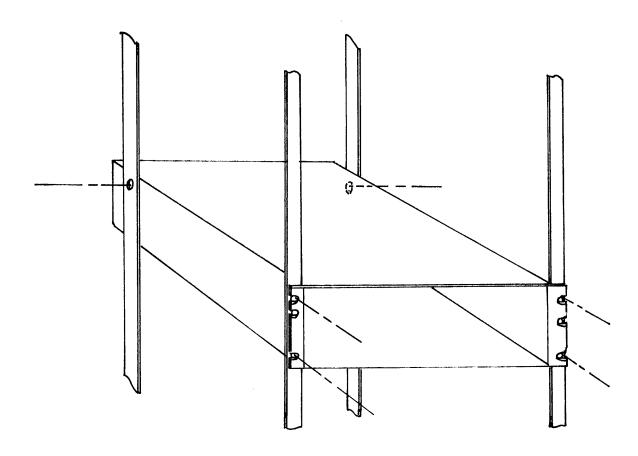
MOUNTING SLEEVE INSTALLATION
